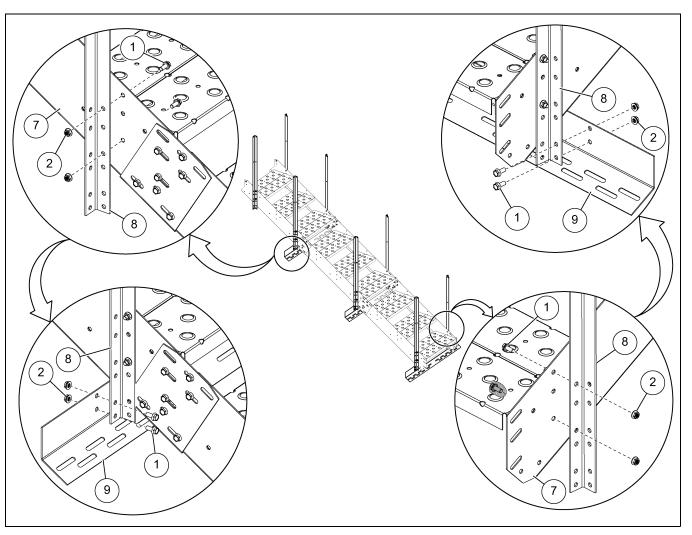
P Assembling the Roof Stair Handrail Posts and Panel Support Brackets
